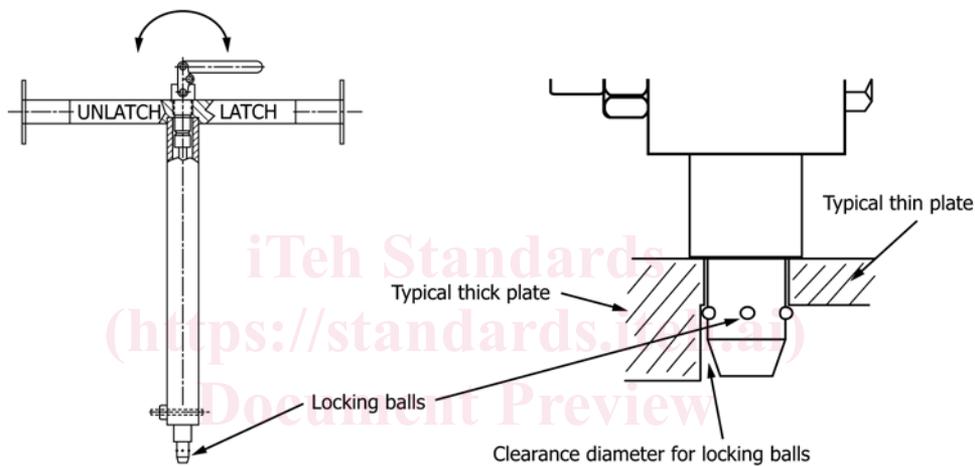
Ball-detent Quick-lifting Handle with Detail of Locking Balls and Clearances
